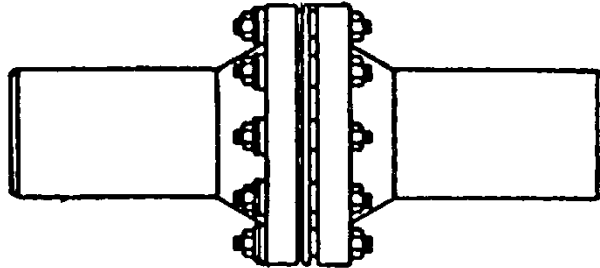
SHOP FABRICATED FLANGE INSULATOR
